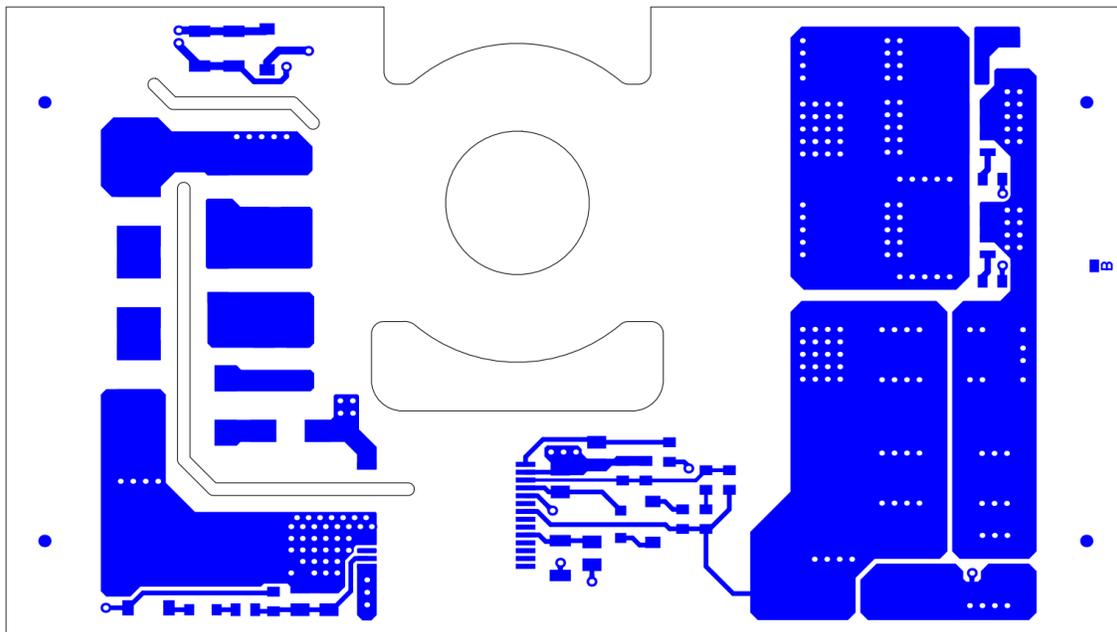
DER-1039Q Mid-Layer 4 PCB Layout.
